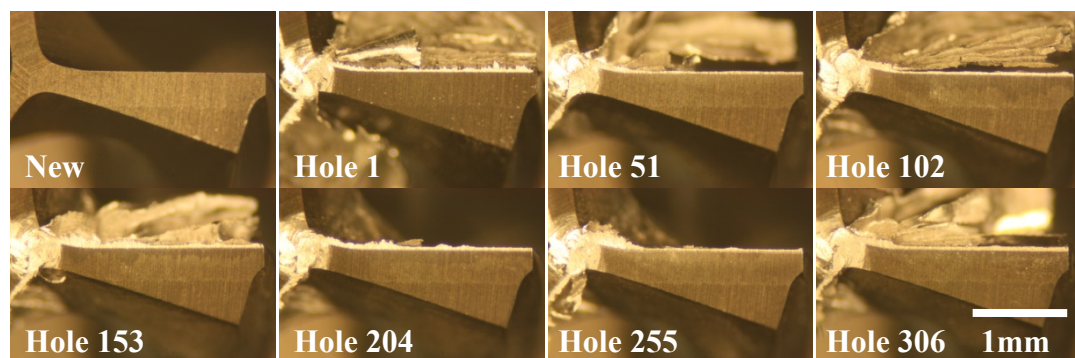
Tool wear micrographs of Dymon-iC™ drill under 3bar cutting fluid, 130m/min cutting speed (Test 5)
